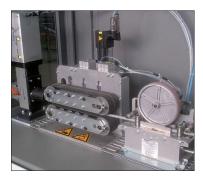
Installation with a calibratable length measuring device, belt feed and pneumatic cable cutter
